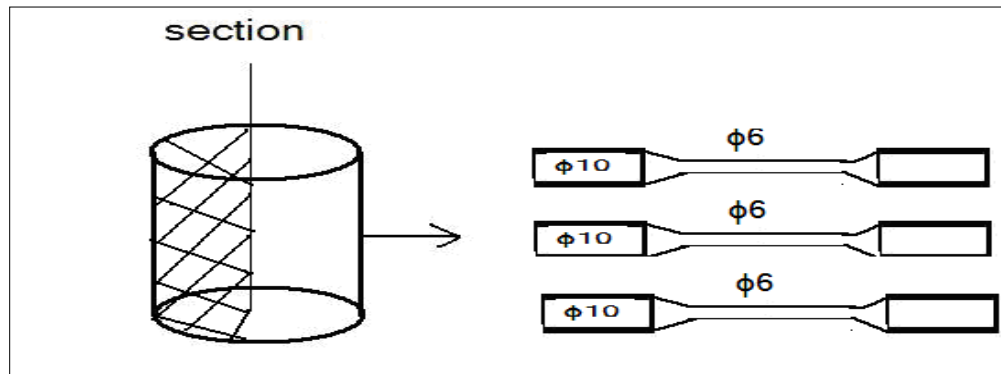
Schematic drawing of tensile test specimen and their location in the mould with ASTM E8.
